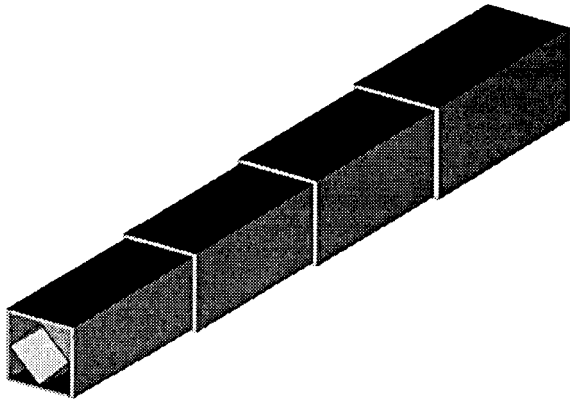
3D View of the longitudinal member with the crushing part inside the supporting part.
